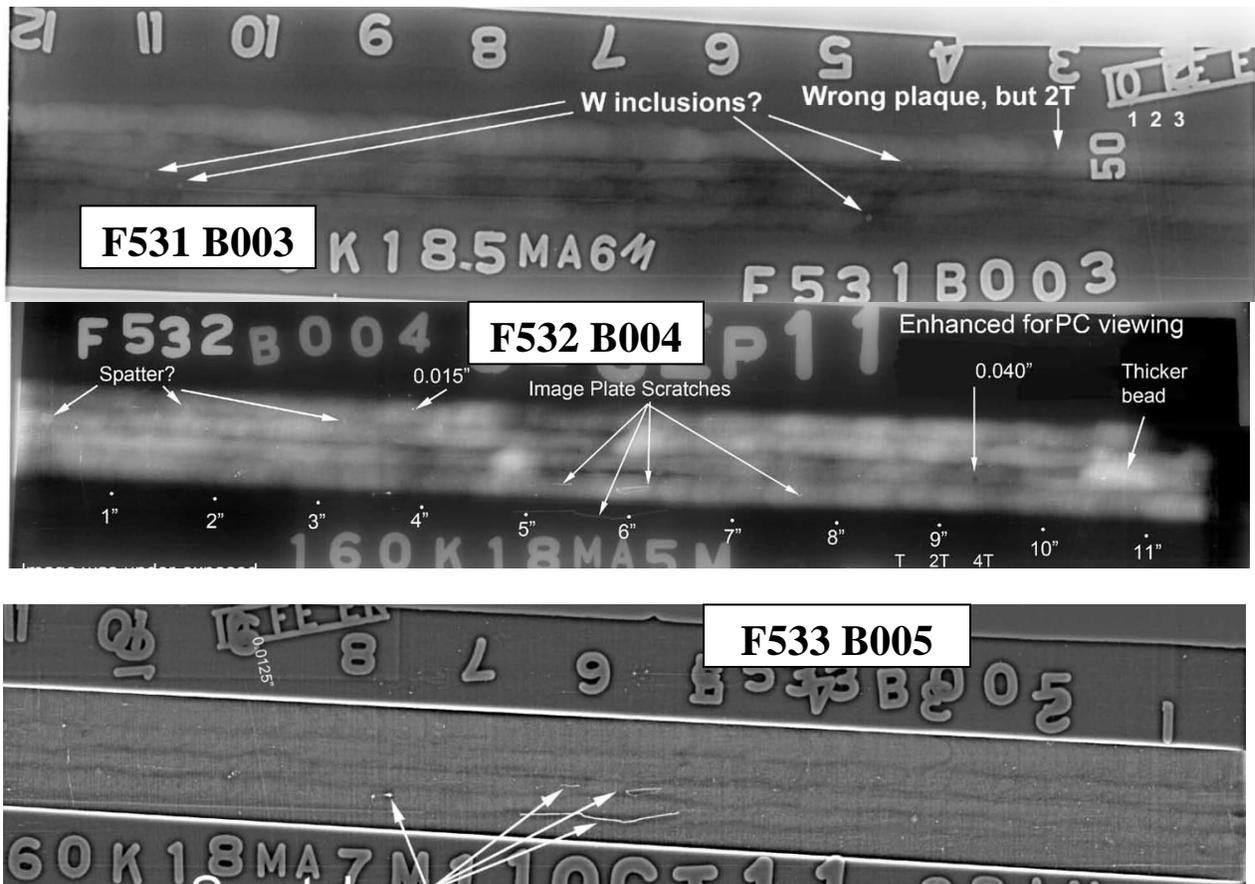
Radiography of the Baseline E308L-16 Welds
